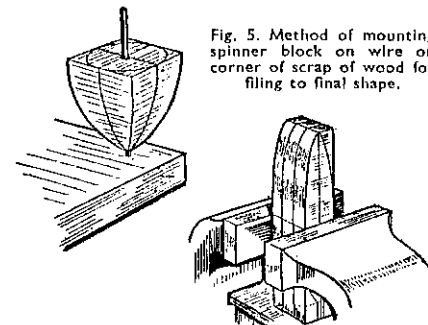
Method of mounting spinner block on wire on corner of scrap of wood for filing to final shape.
